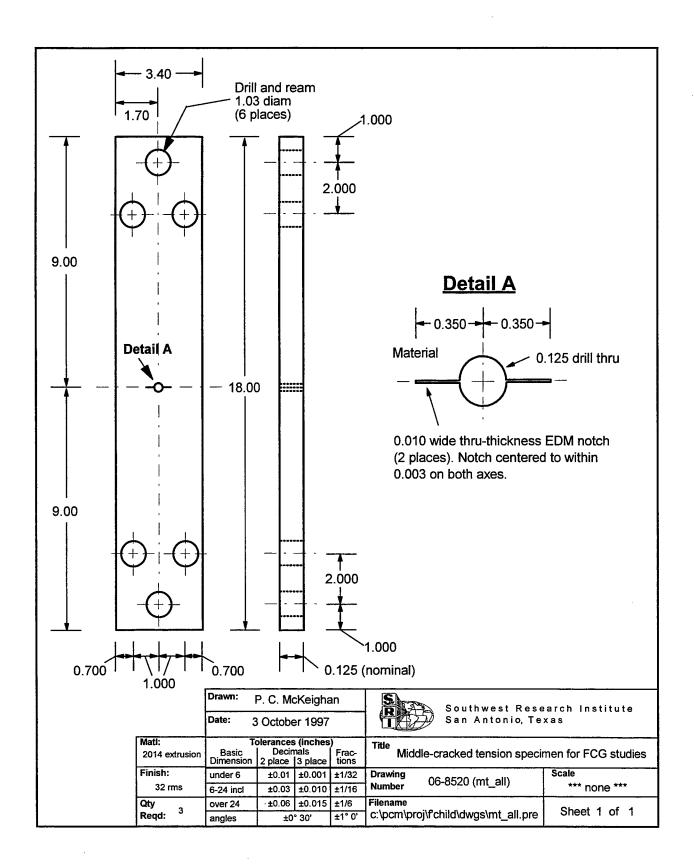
Design for the Middle Crack Tension Specimen for Fatigue Crack Growth Studies
